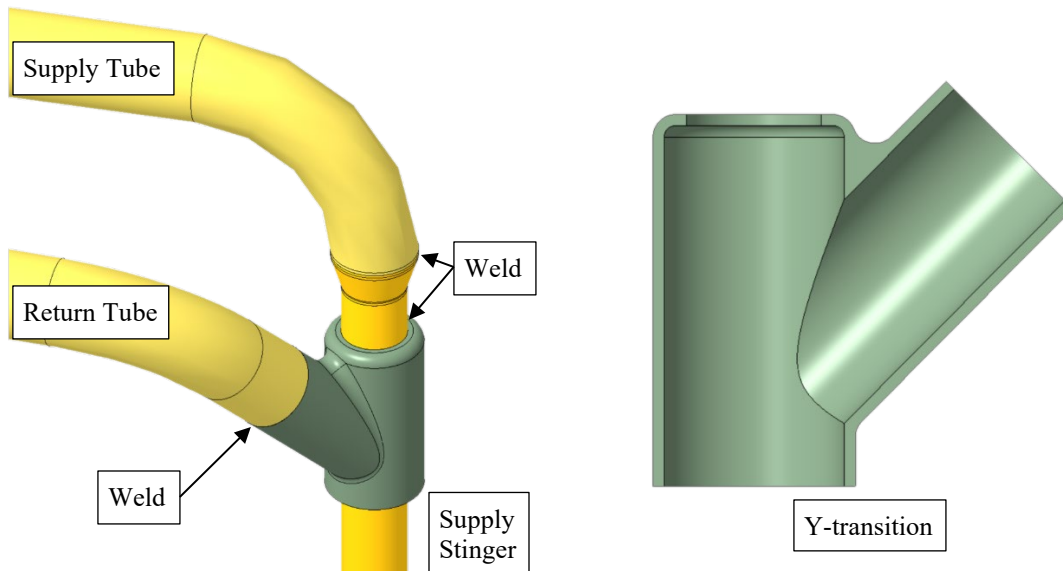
Upper hydrogen vessel supply and return. Y-transition and supply stinger tube are machined parts.
